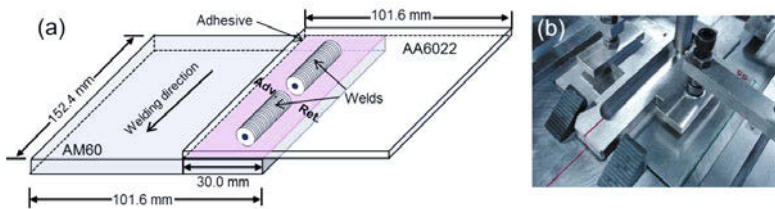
FSLW of Al to Mg sheets (a) schematic of welding configuration (b) clamping fixture used to secure the two sheets during welding.
